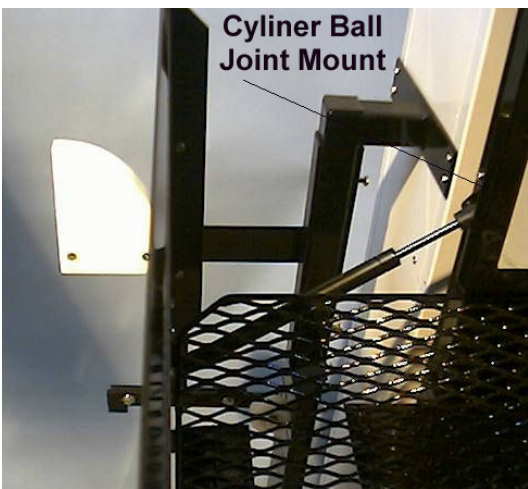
TOE PLATE IN VERTICAL POSITION WITH CYLINDER MOUNTED TO CARRIAGE ARM VIA CYLINDER BALL JOINT
